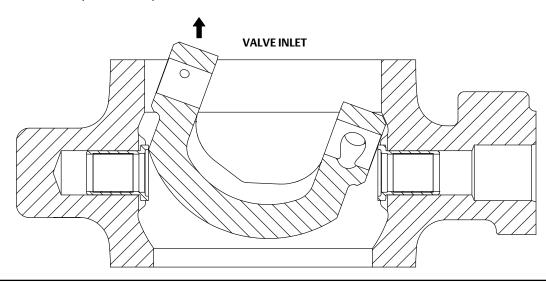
DN 150, 200, and 250 (NPS 6, 8, and 10) Ball Removal
